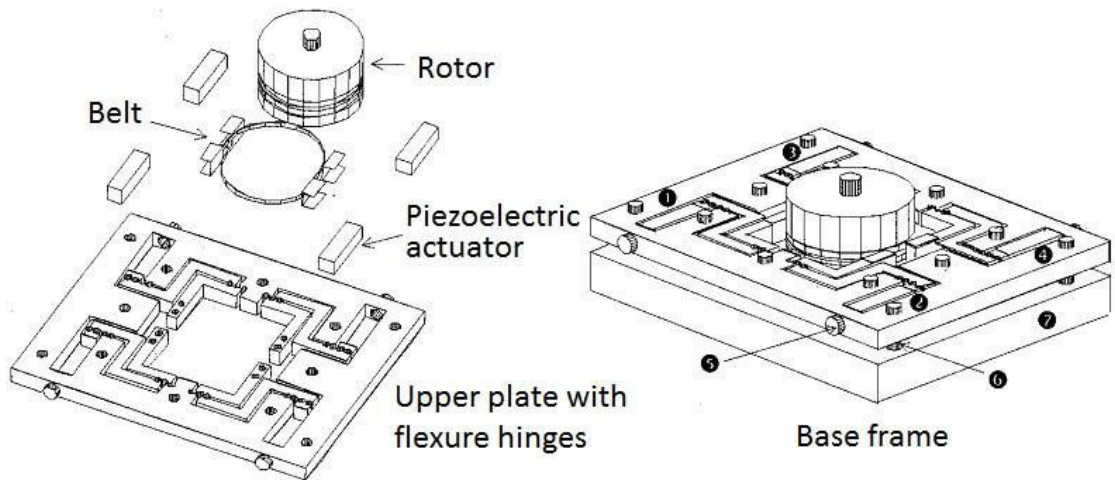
Assembly diagram of shaft piezoworm motor actuated by belts [67]
